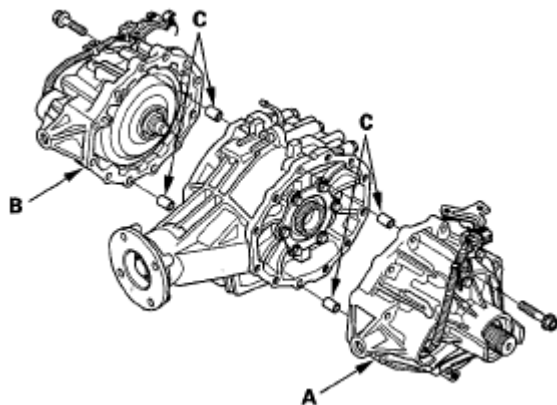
Identifying Dowel Pins, Left And Right Side Case
